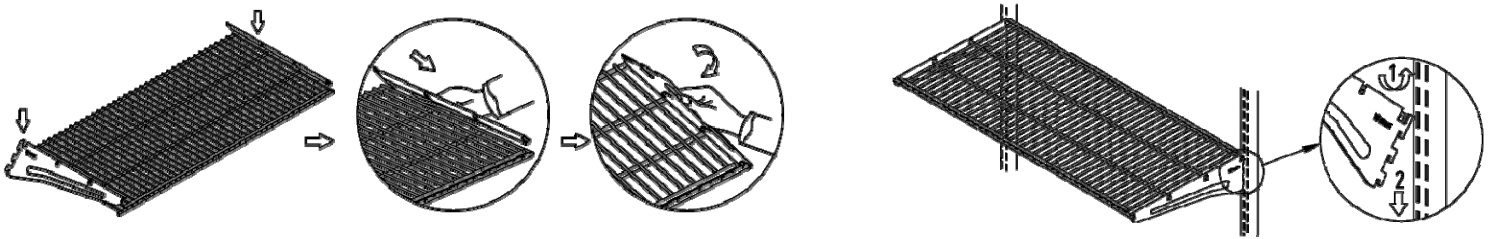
Wire Bracket Bracket installation and hanging installation
